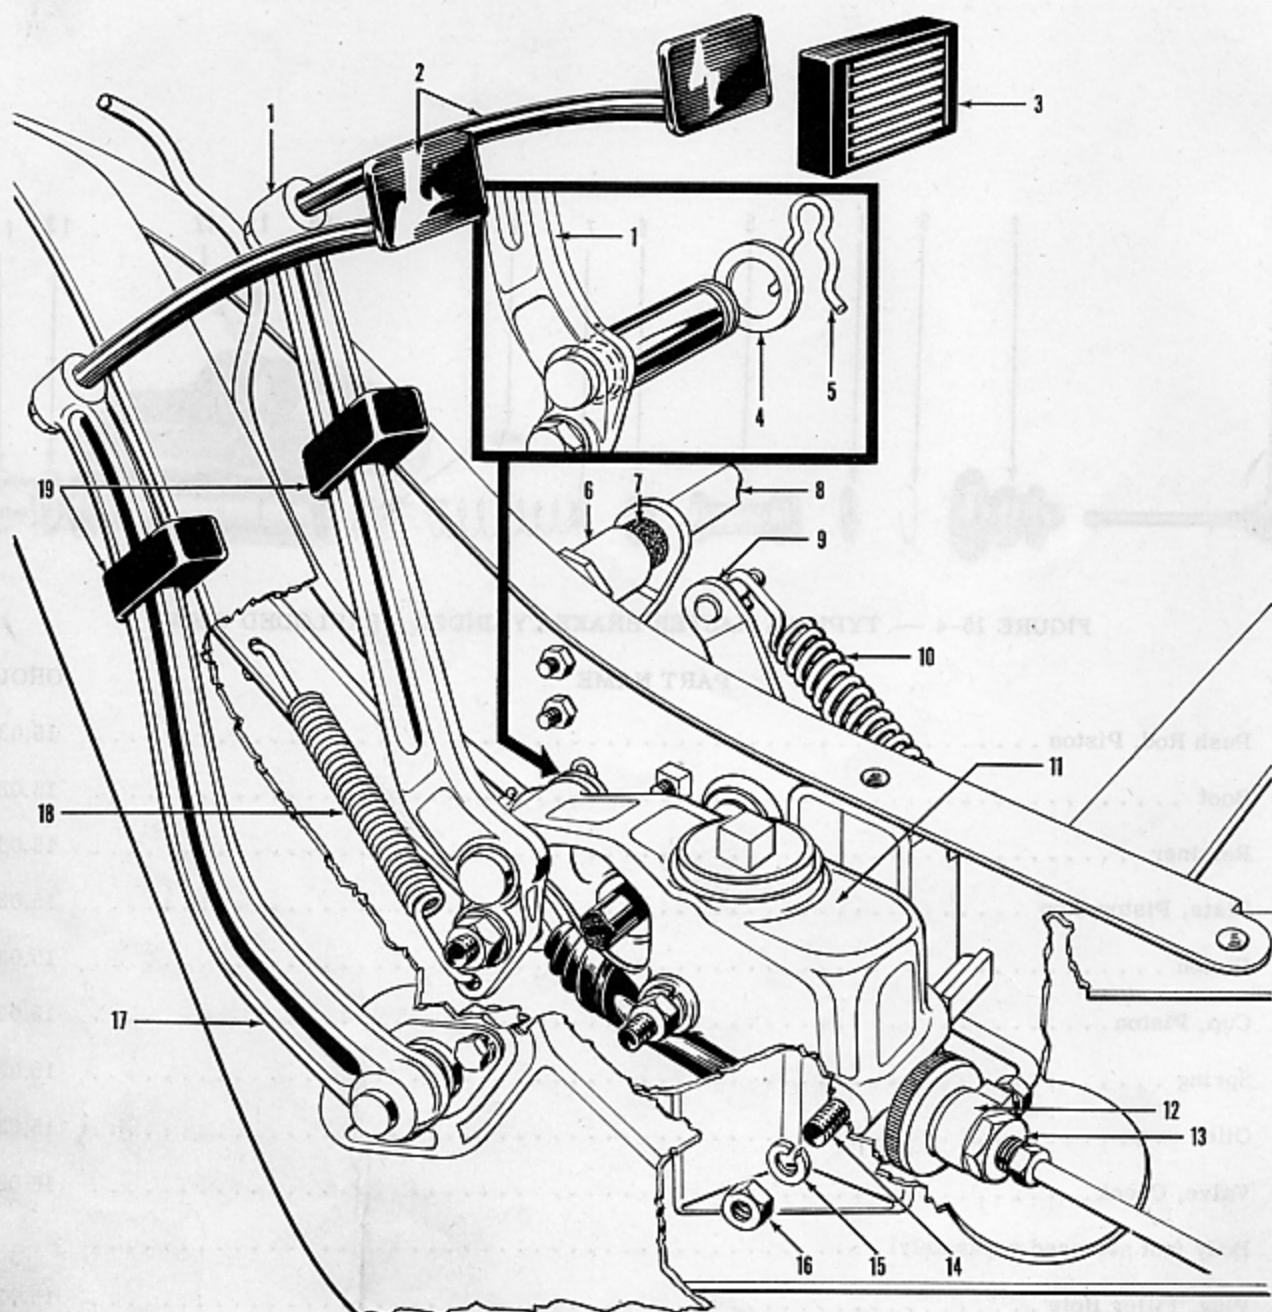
TYPICAL BRAKE LINKAGE - EXPLODED VIEW
